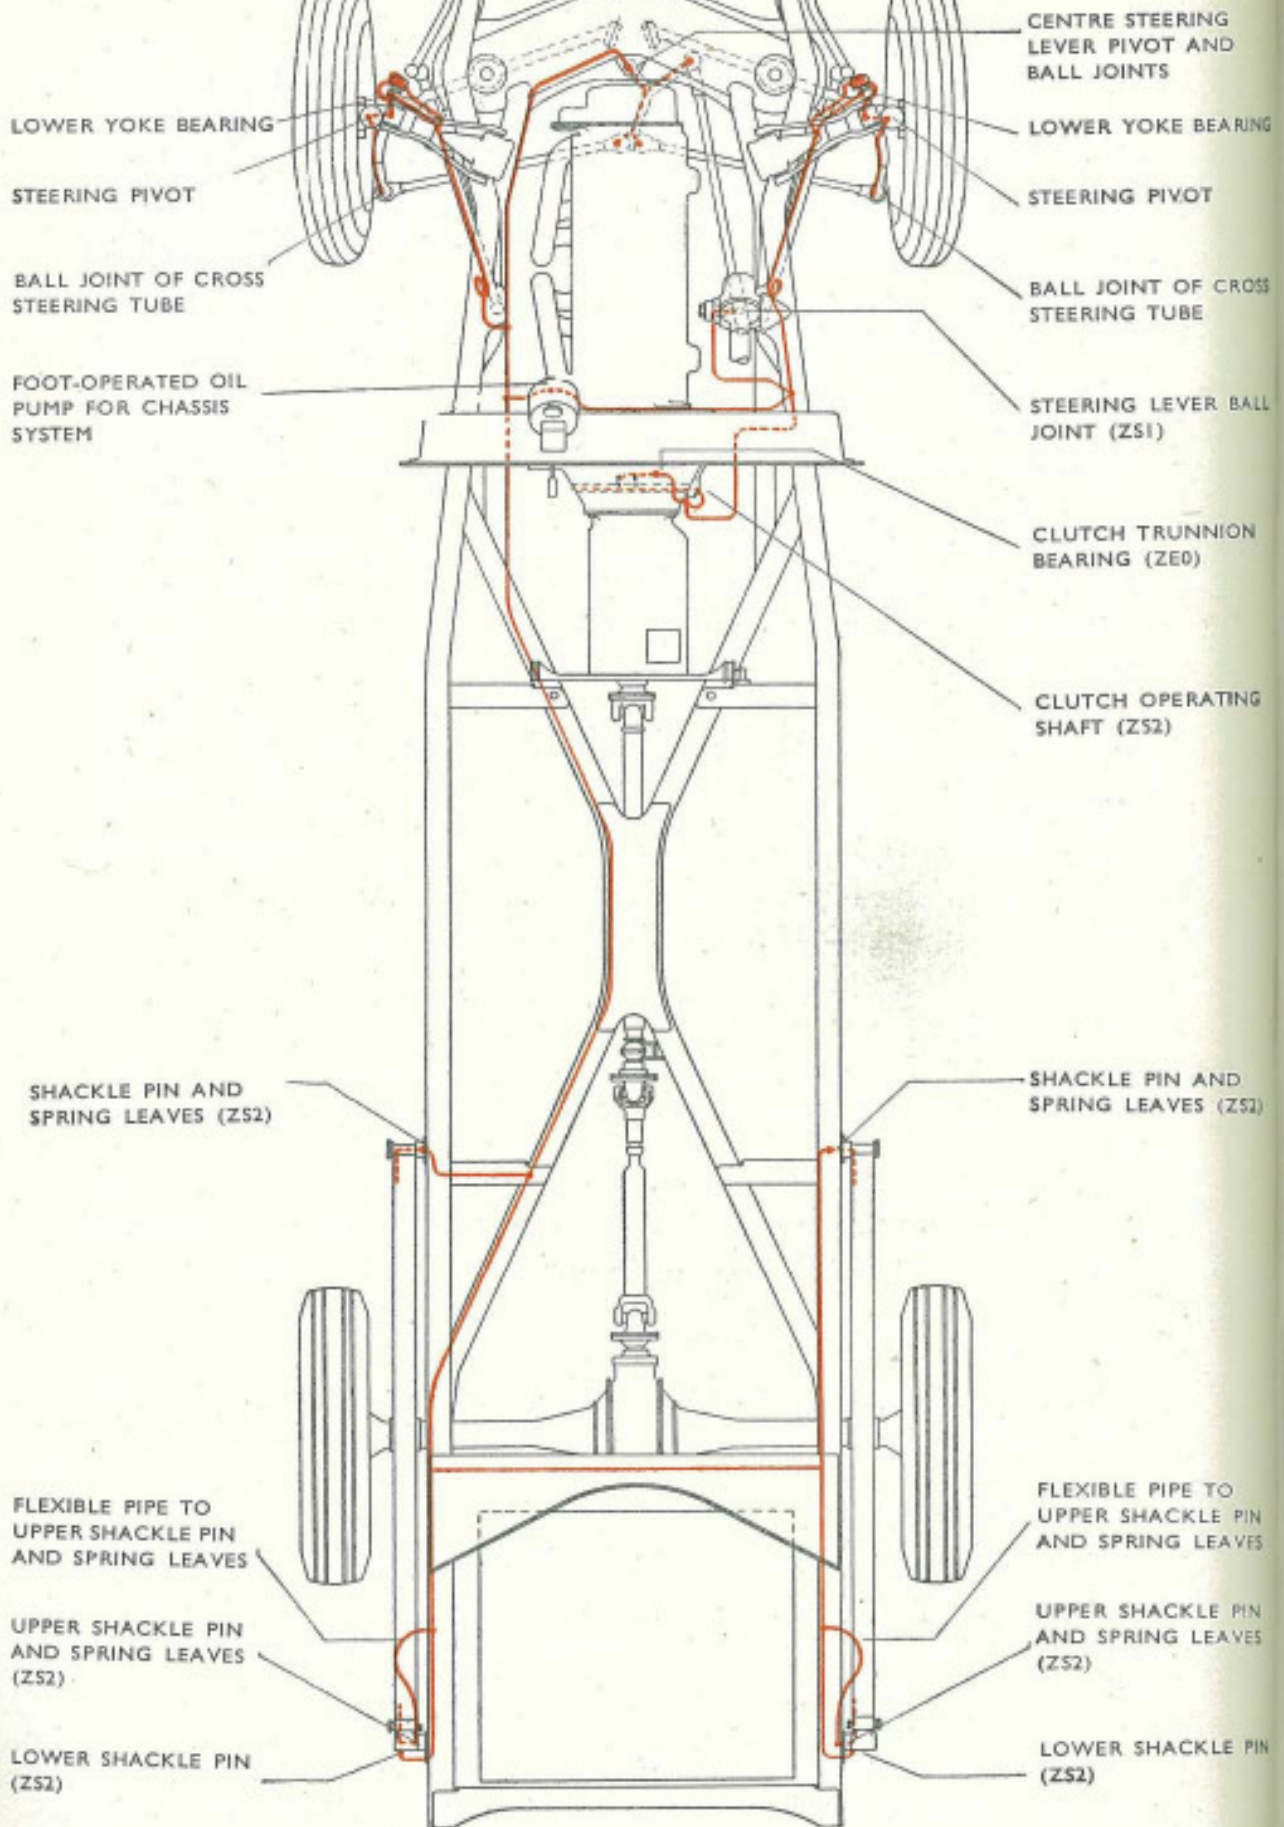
DIAGRAM OF CHASSIS LUBRICATION SYSTEM.
